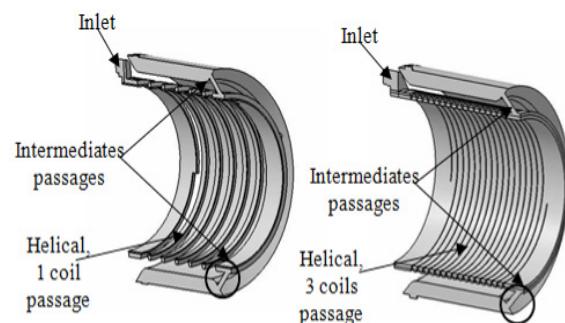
Half of the fluid block domain, for the two types of geometry (left: one coil geometry; right- 3 coils geometry)
